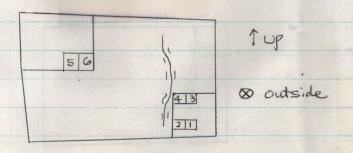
Locations of Gat up Samples for Bustle Pipe
